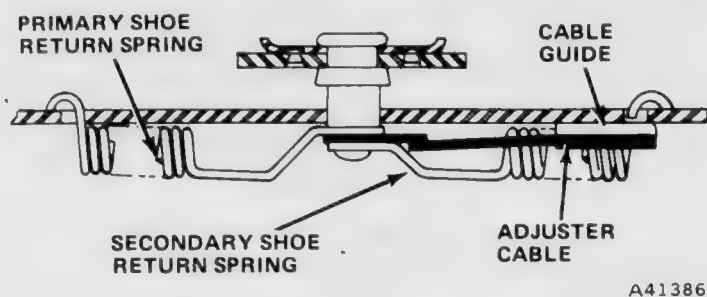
F-45 Adjuster Cable and Return Spring Installation—9-Inch Brake
